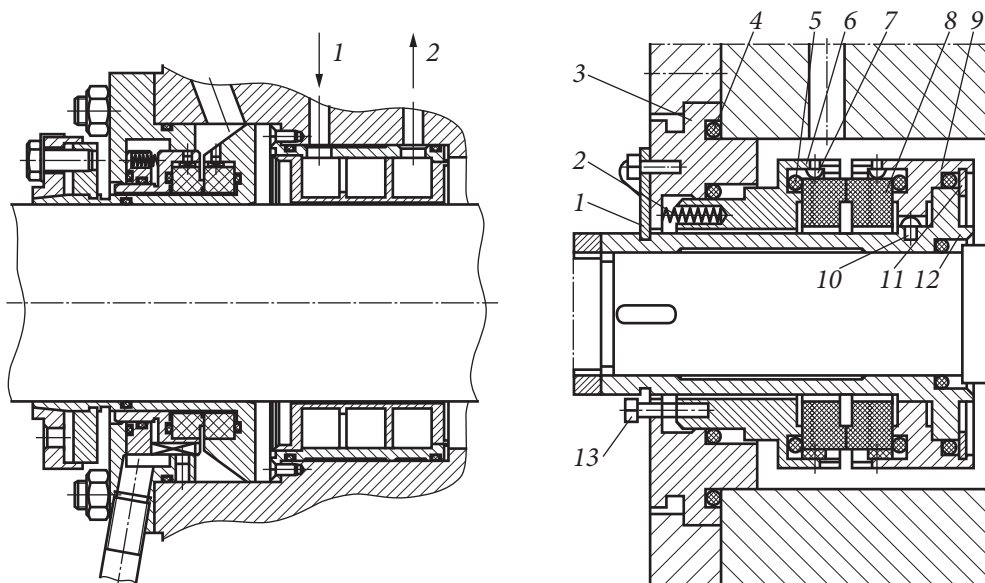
Mechanical seal of booster feed pump PE 500-180-3
